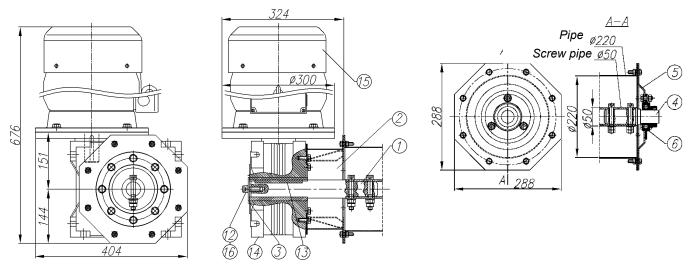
PS220-N7.5/300-screw conveyor -220 - a drive of power P=7.5 kW, n=300 rpm
